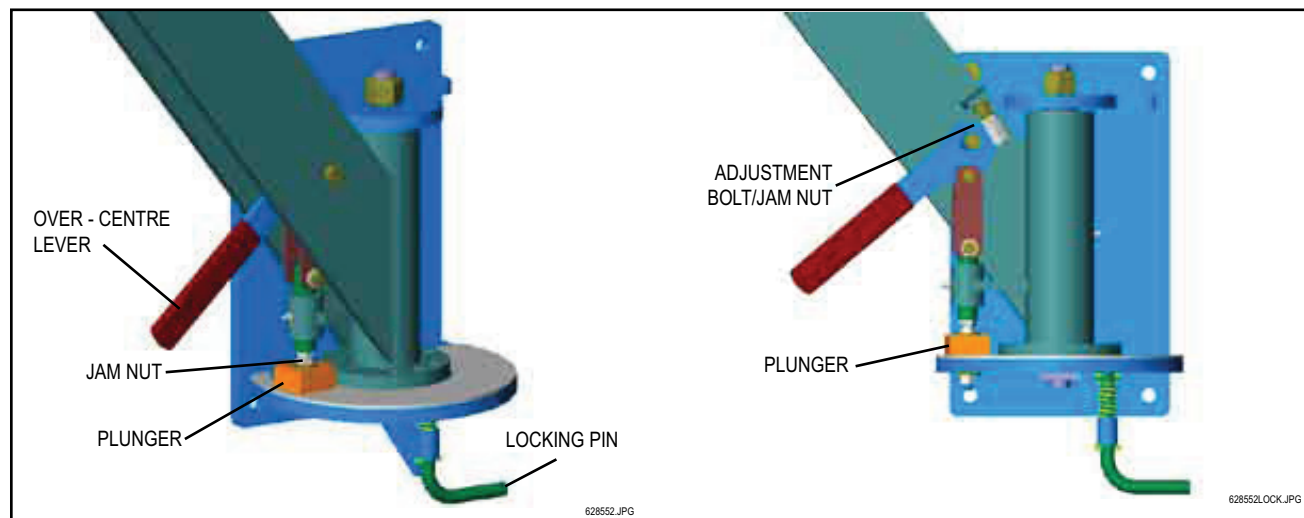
8" Standard Load/Unload Auger Base Clamp
